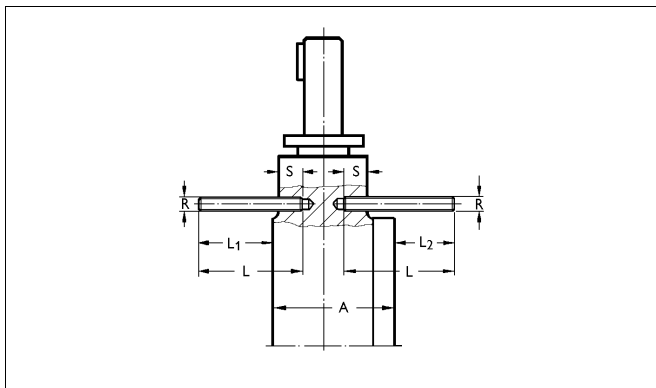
Stud bolt mounting dimensions, mounting options SB, BH
